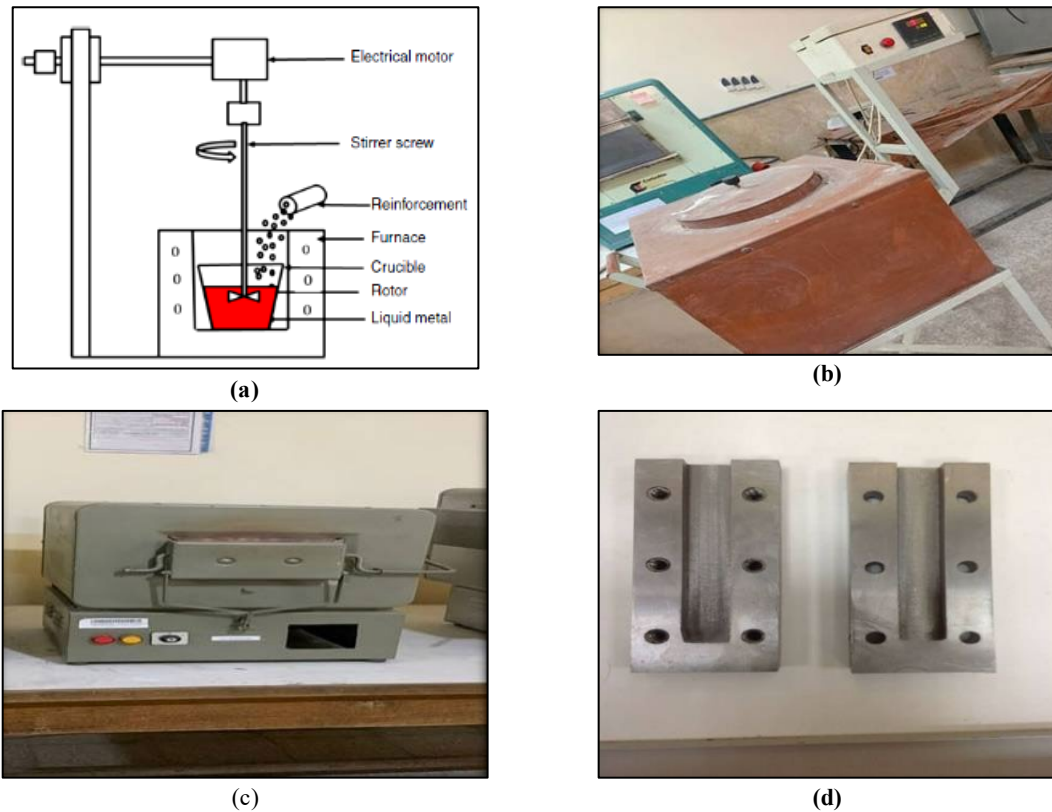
(a) stir casting setup [26], (b) the electric melting furnace, (c) muffle furnace, and (d) steel mold
